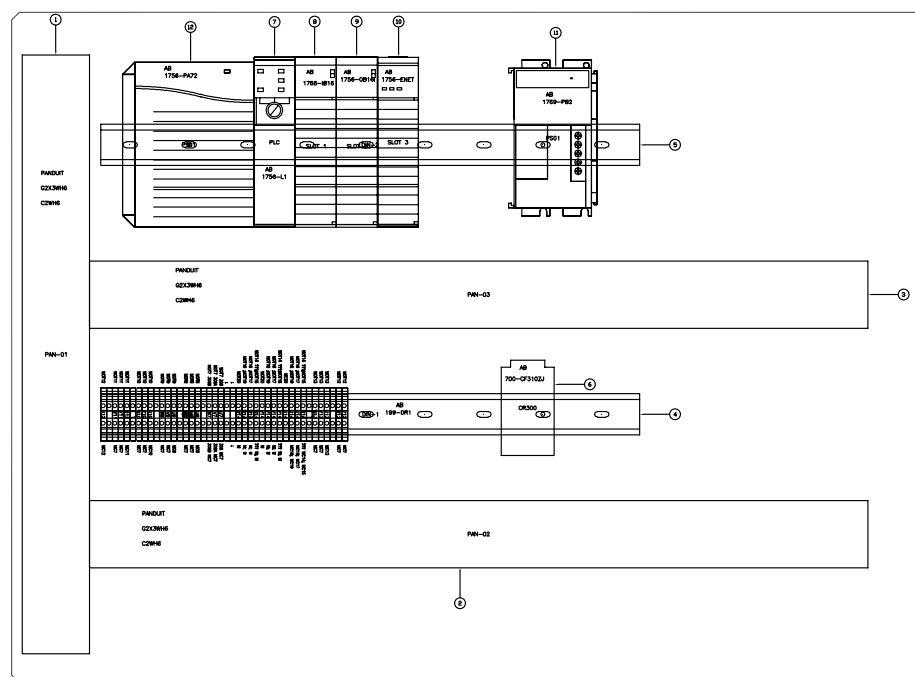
Attributes inserted in the lower part of the panel layout drawing
